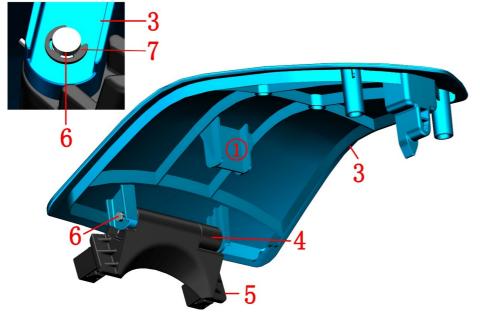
FUEL TANK COVER COMPONENT		Tank cover, tank cover, tank lock	CHK
